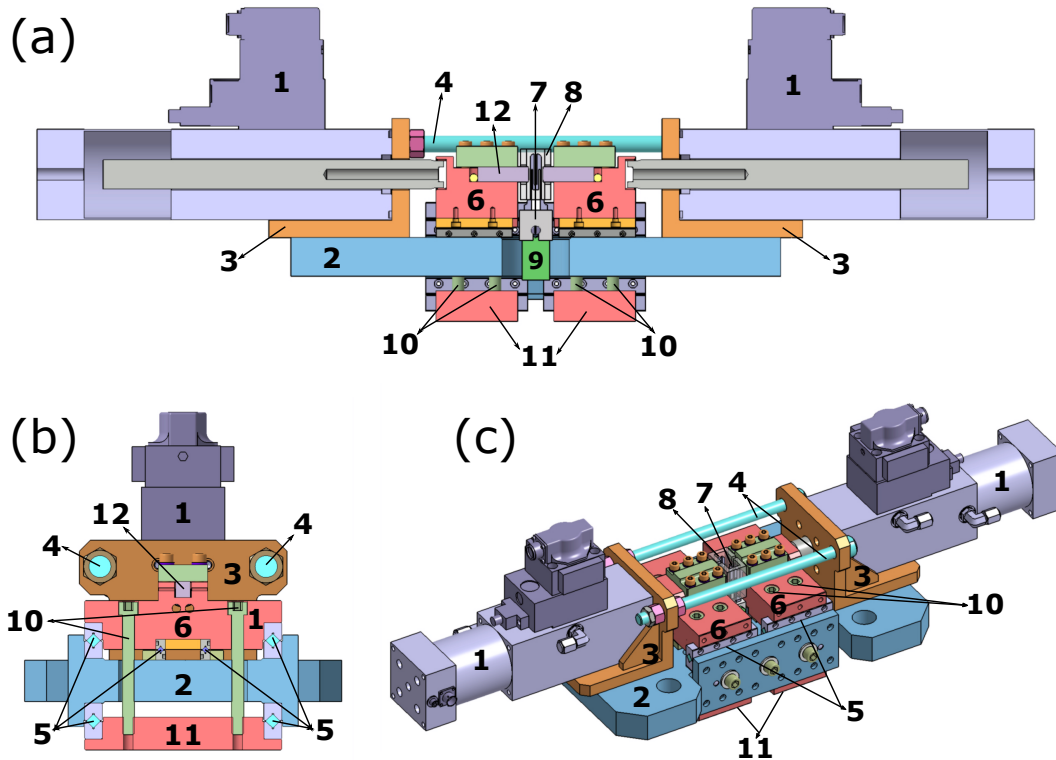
Drawings of the UnB's fretting apparatus: (a) Side cut view; (b) Transverse cut view; (c) Isometric view. Numbering caption: 1 - MTS servo hydraulic actuators; 2 - apparatus main plate; 3 - actuator bracket; 4 - stiffness bars; 5 - linear bearings; 6 - pad holder; 7 - igniter; 8 - ceramic casing; 9 - igniter support; 10 - pre-loading screws; 11 - bracket plates; 12 - pad.
